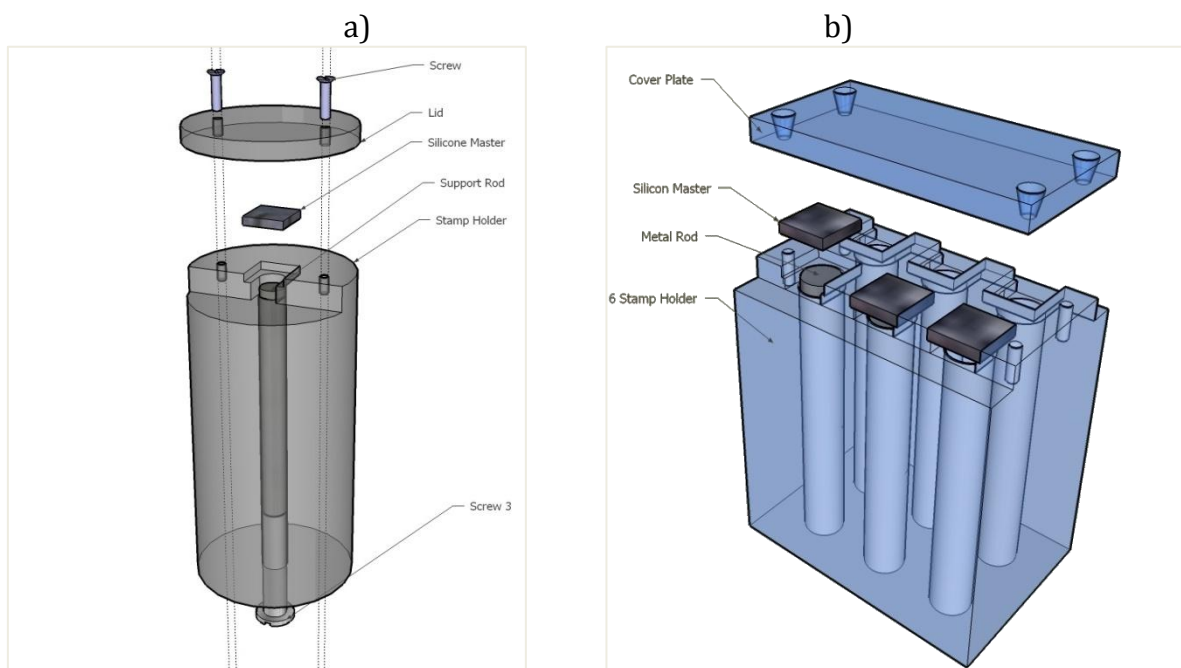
The parts used to cast the PDMS against the master to produce a micro-stamp. a) The old, single stamp casting holder as described in (Lauer et al., 2001). b) The newer 6 stamp casting holder. This machined device significantly reduced the amount of time required for making multiple micro-stamps. (Note: Silicon masters are 5 mm<sup>2</sup> x 1 mm).
